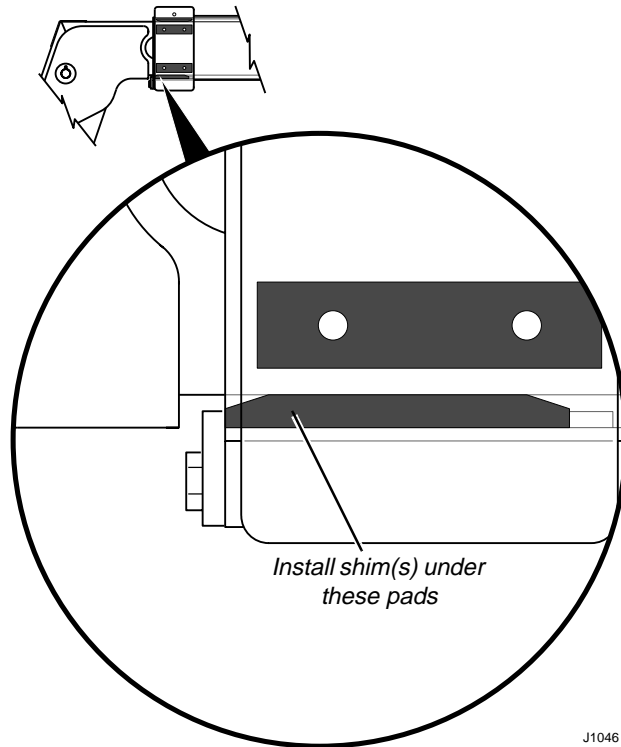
Boom Section Gaps – Front of 2-Section Boom
